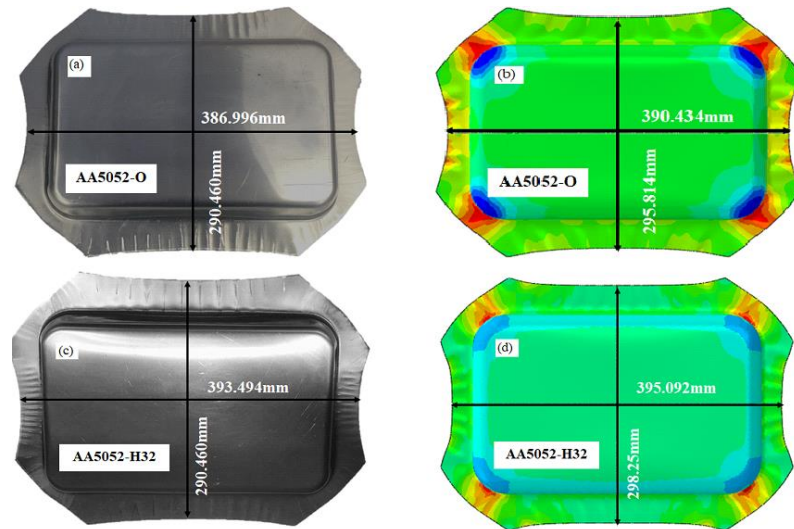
Measured rectangular cup drawing of investigated sheets a, c) experiment b, d) simulation
